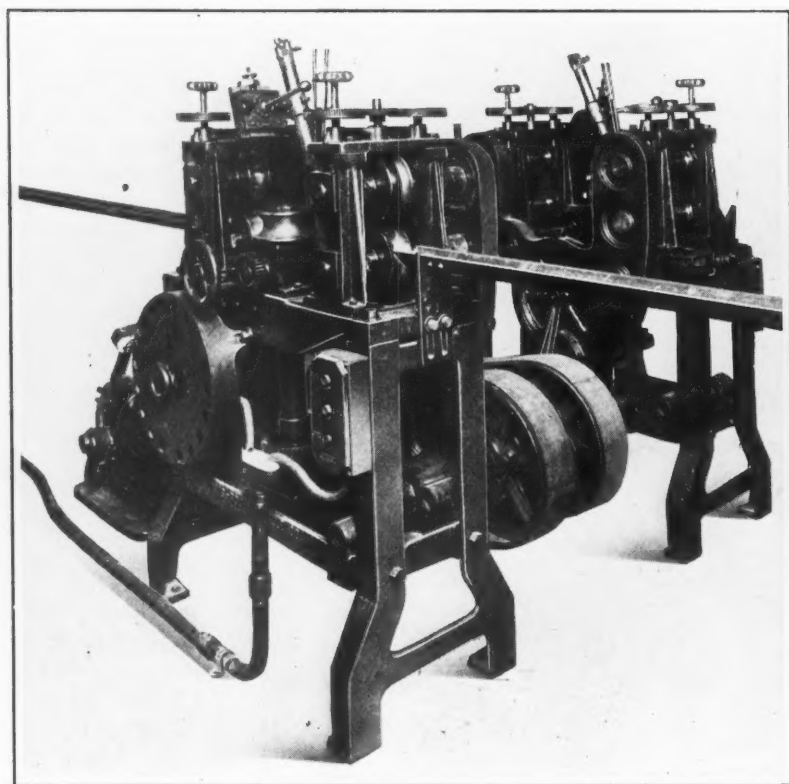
Tube-welding Machines built for Right- or Left-hand Operation
